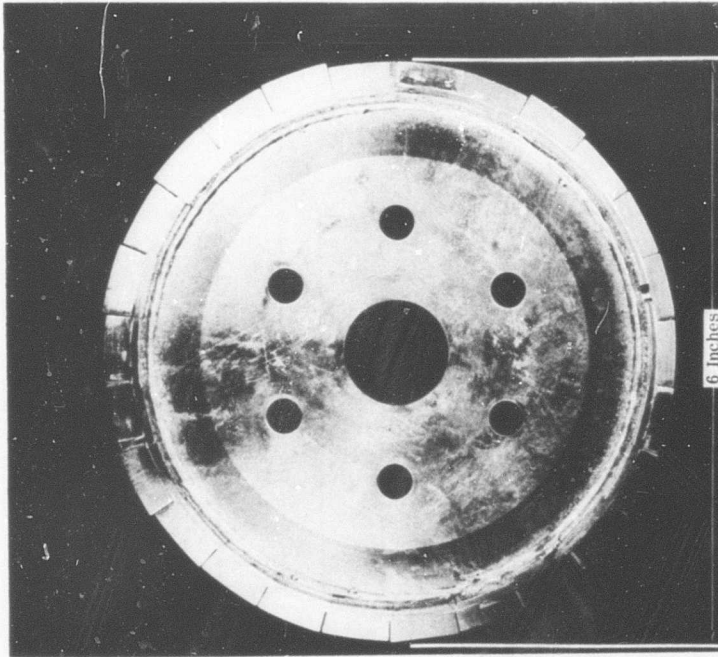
Weld Root From Blade-to-Disc Weld Specimen Showing Full Penetration.
